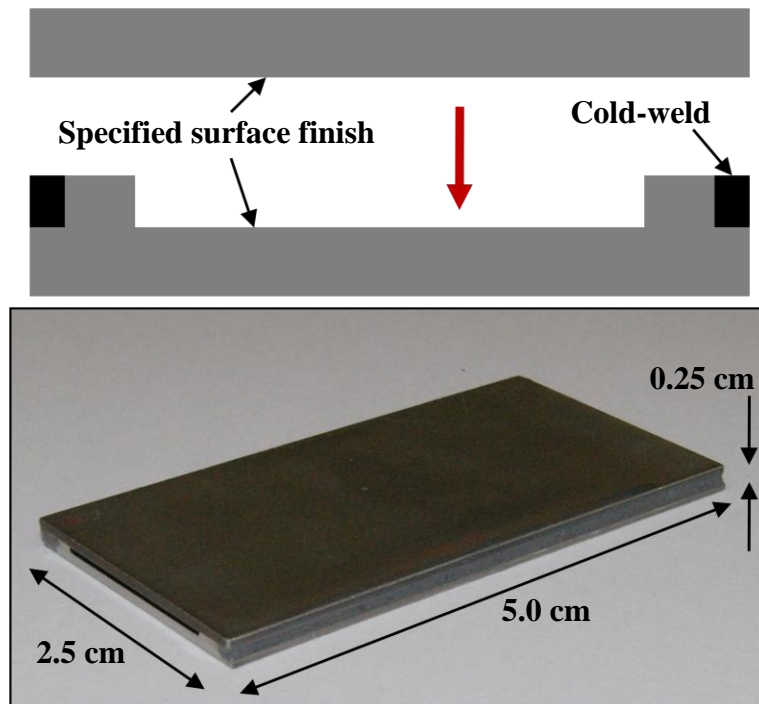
Diagram of coupon assembly process and overall dimensions.
